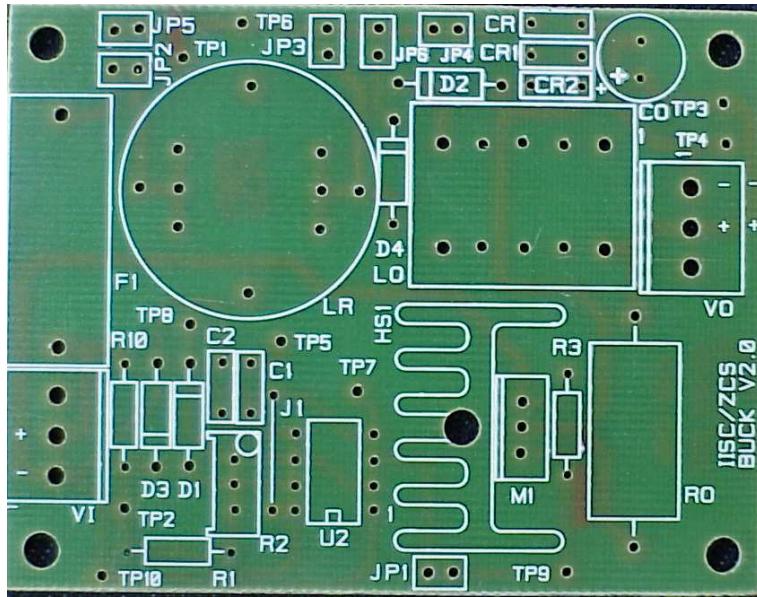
Bare PCB Board of ZCS-Buck Converter
